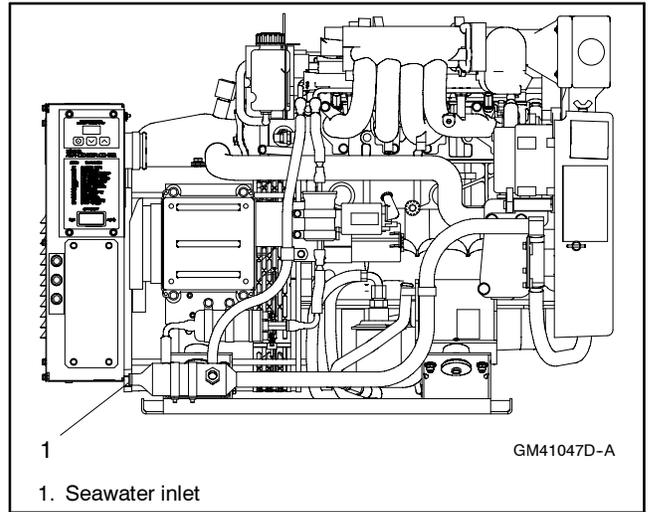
Seawater Inlet Connection, 10/13/15EGD, 9/11EFGD, and 13/15EGZD Models
